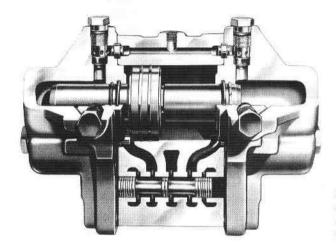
Automatic pressure intensifier. (Courtesy of Rexnord Inc., Hydraulic Components Division, Racine, Wisconsin.)
